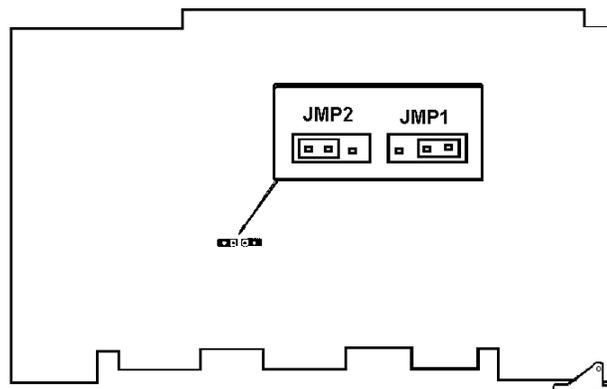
8182 Parts Counting Scale Logic PCB Jumper Selection
